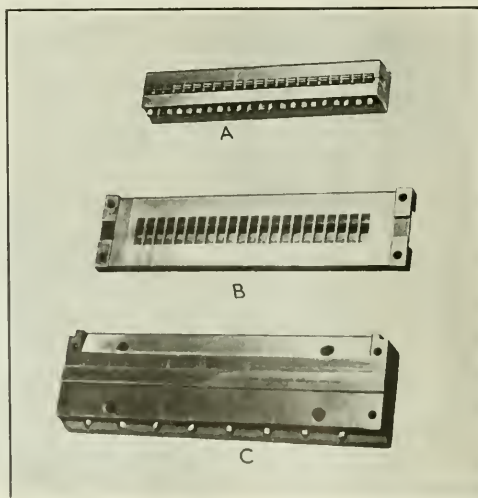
(A) Assembled Punch-holder; (B) Under Side of Stripper Plate; (C) Die Strips assembled in Die-block
